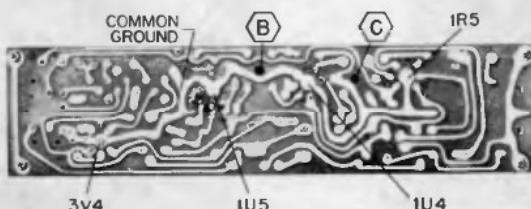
Bottom View of Chassis 200. Tube Locations and Alignment Points Shown.
